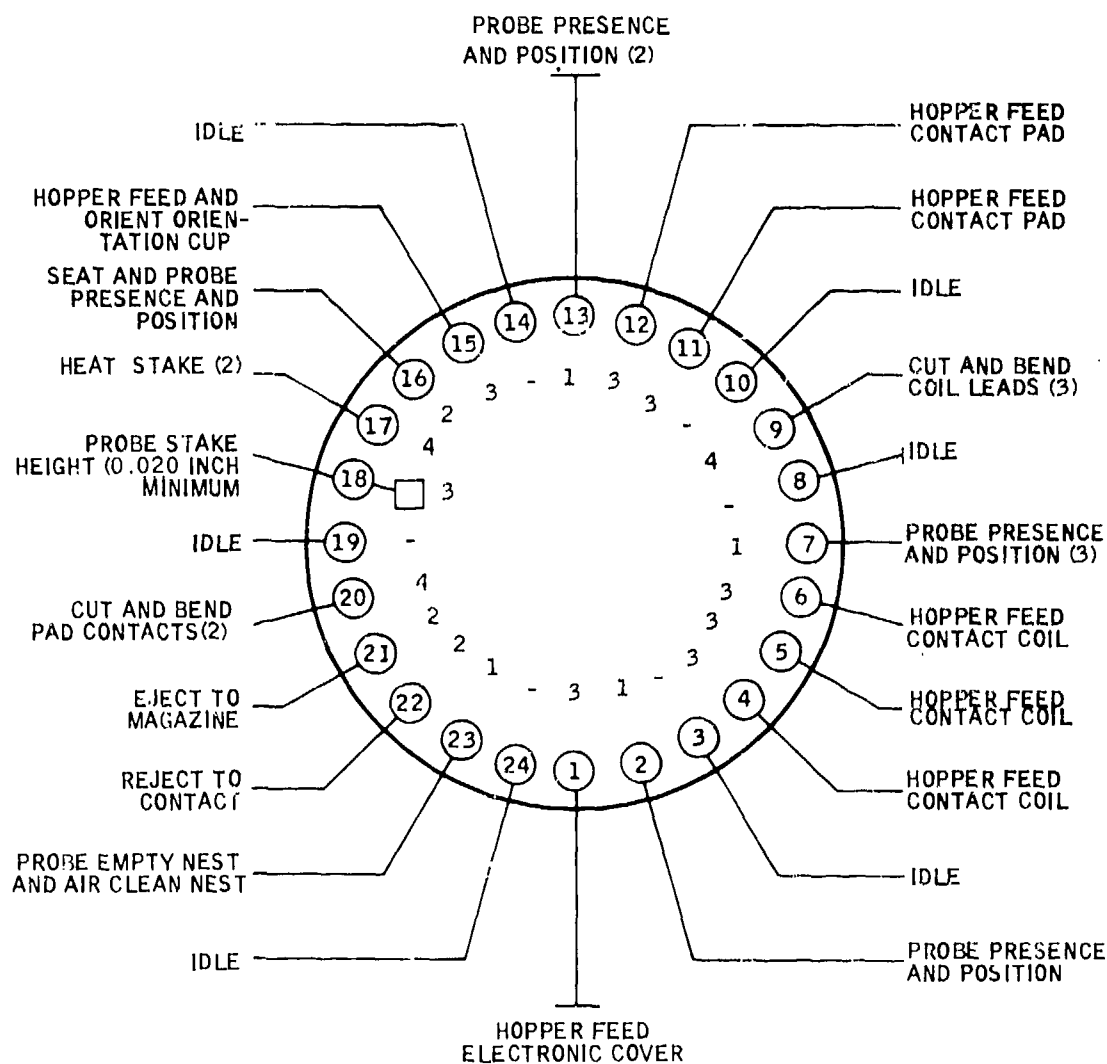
Dial schematic, machine E1 - electronic cover and orientation cup assembly
